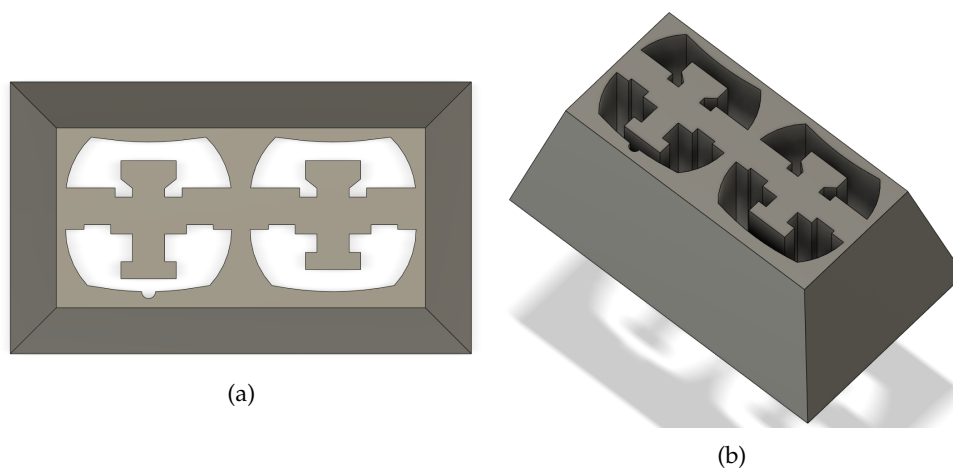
Example of the moulds used to fabricate the tube furnace crucibles with set precursor-to-sample distances. (a) Top view and (b) side view.
